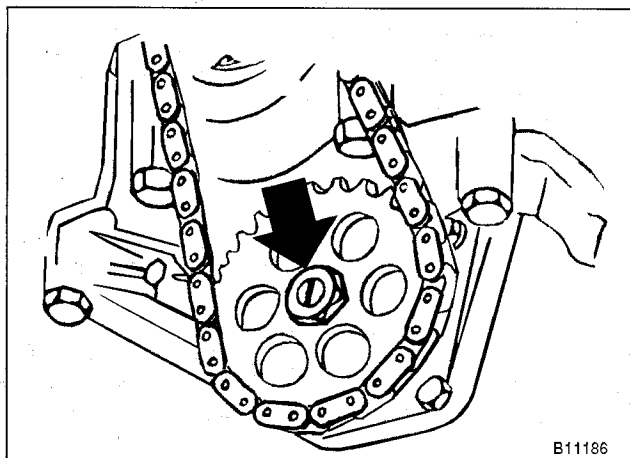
Oil pump sprocket mounting nut (left-hand thread) on 6-cylinder engine (arrow).
